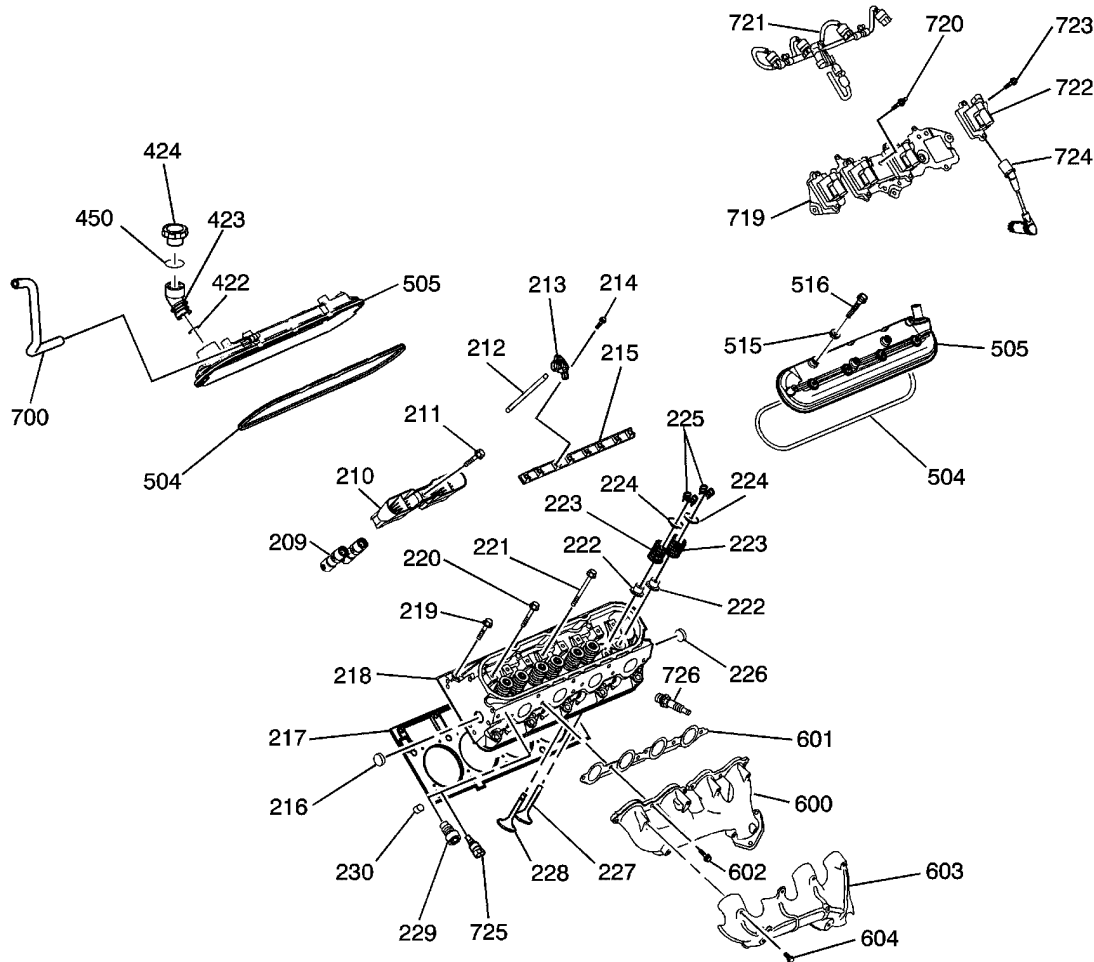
Cylinder Head/Upper Engine Disassembled View
